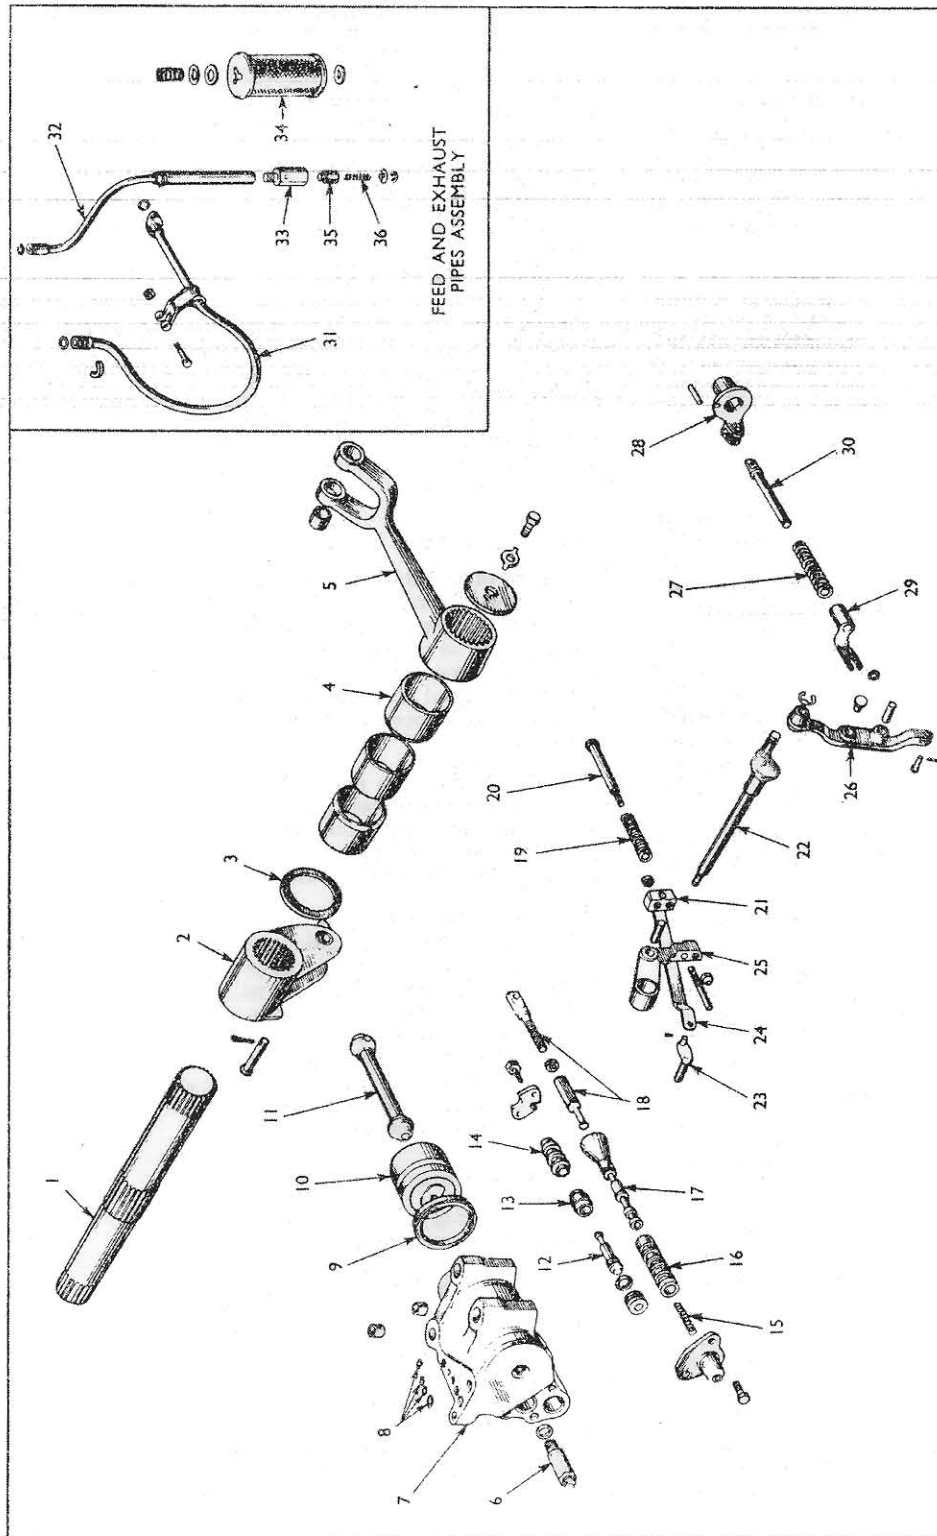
Hydraulic Lift Cylinder Assembly, Linkage and Lift Arms, Feed Pipe and Exhaust Filter Assembly
